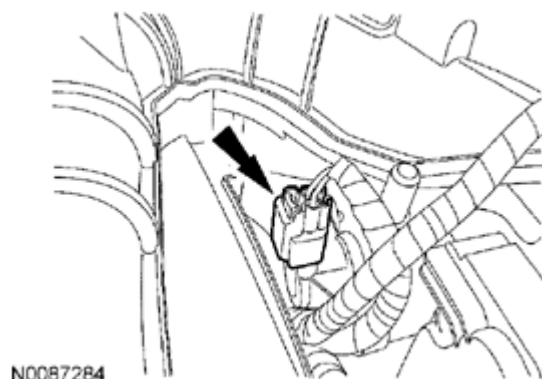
Locating Evaporative Emission Canister Purge Valve Electrical Connector
